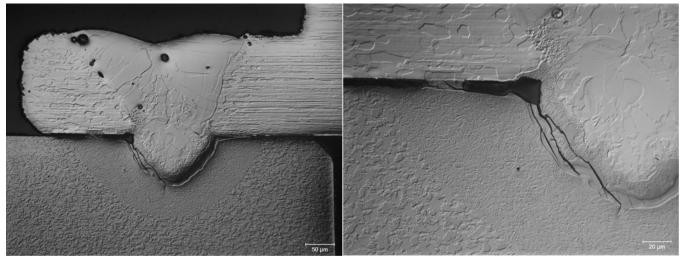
Ion-milled specimen showing microstructure and cracks at weld joining platinum to stainless steel.
